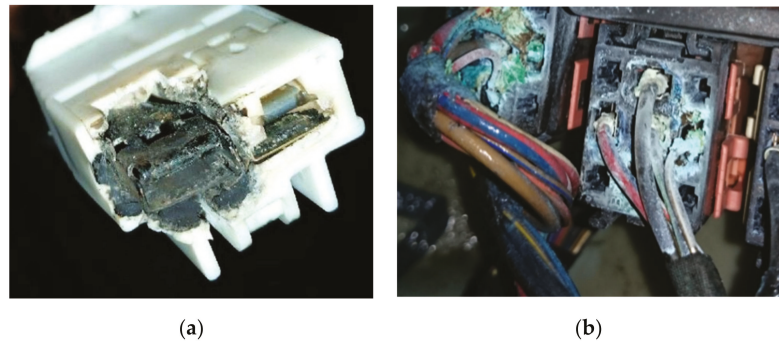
Examples of corroded connectors: (a) corroded AC blower wire harness connector in an Acura TL [20]; (b) corroded wiper control relays in a BMW 7 series [21].
